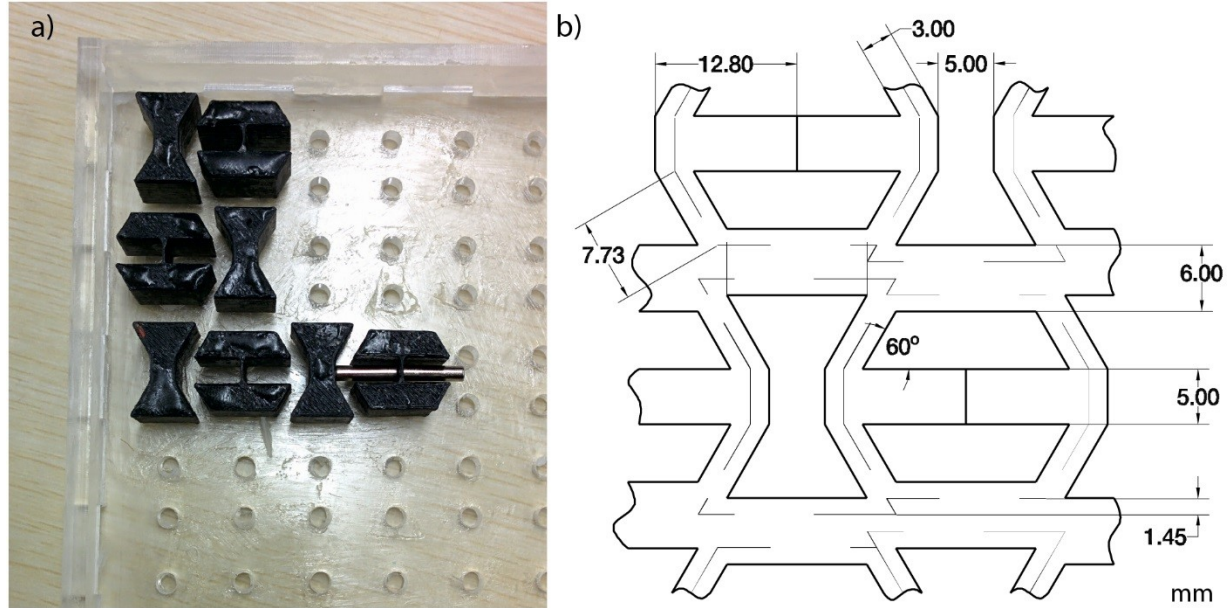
a) Image of the mold. The outer clear box is fabricated by laser cutting a cast acrylic (PMMA) sheet. The inner parts that are inserted, in black, are 3D printed with a FDM printer. b) Sketch of the manufactured material with the significant dimensions (in millimeters).
